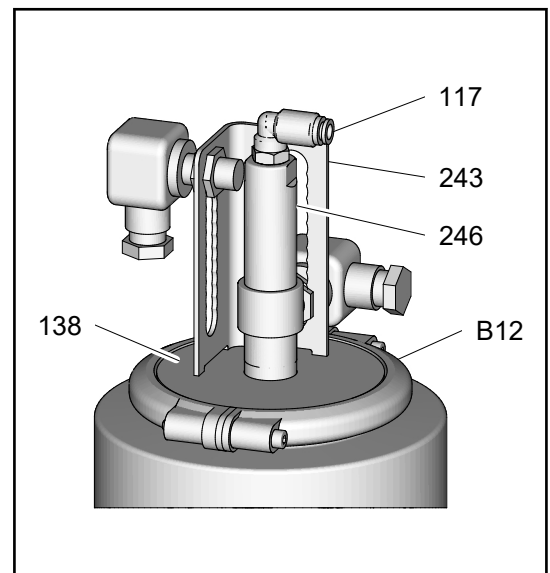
Valve with connection INA [initiator mounting on actuator]
